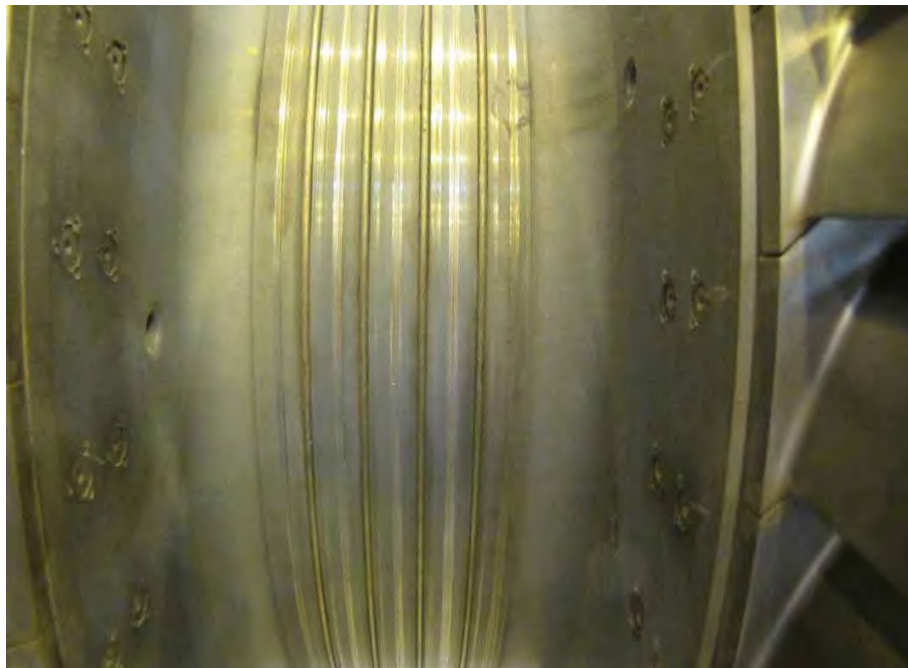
Photograph of high pressure rotor shown in Fig. 12 showing rub damage to interstage seal areas.
